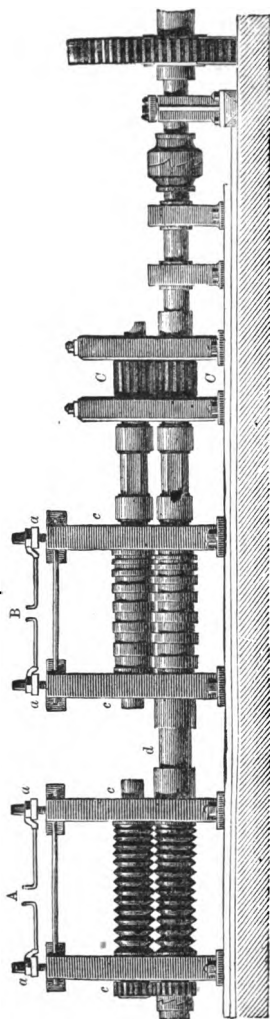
Forge-train, or Mill for Rolling Puddled Bars. A, Roughing rolls; B, Finishing rolls; a a, adjusting screws; b b, connecting cogs; c c, cast-iron "housings"; d, coupling.
